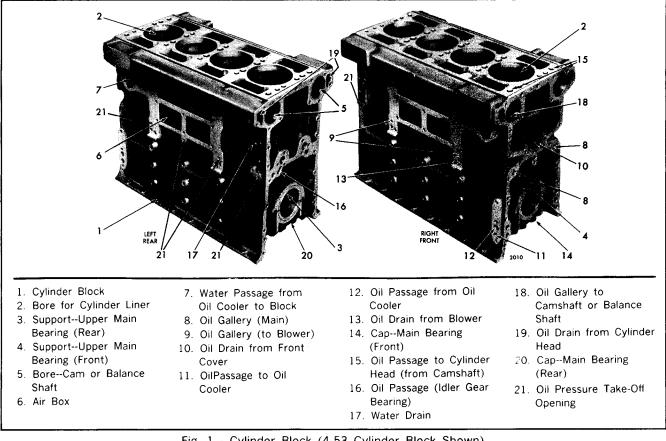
Cylinder Block (4-53 Cylinder Block Shown)
